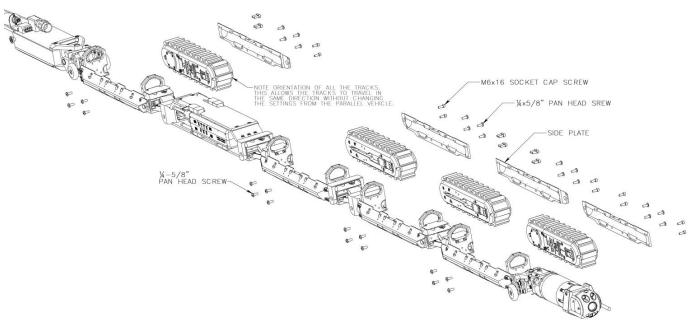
INLINE TRACK MOUNTING SCREWS
